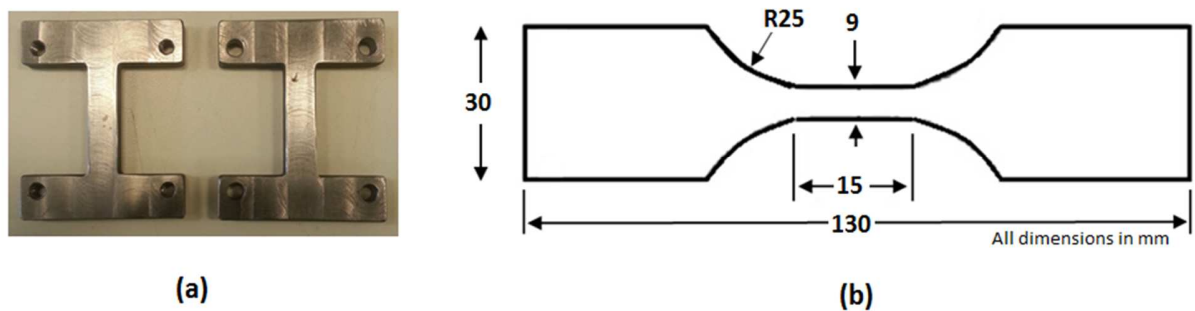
(a) The anti-buckling fixture, (b) the cyclic test specimen
